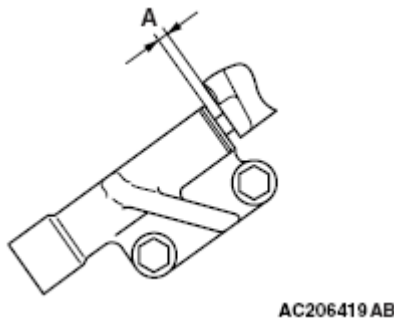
Identifying Auto-Tensioner Pushrod Clearance
